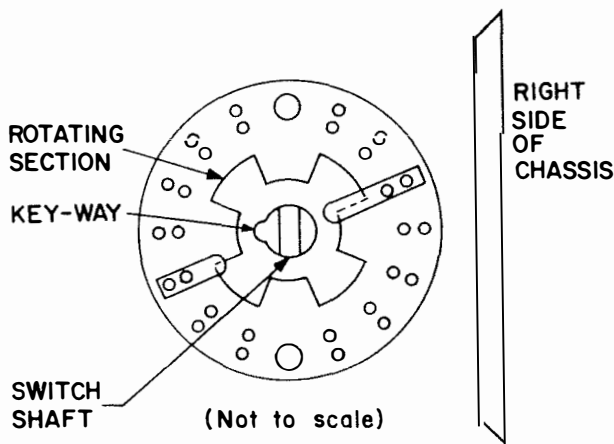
Top View of a S-206 Switch Wafer and Shaft
